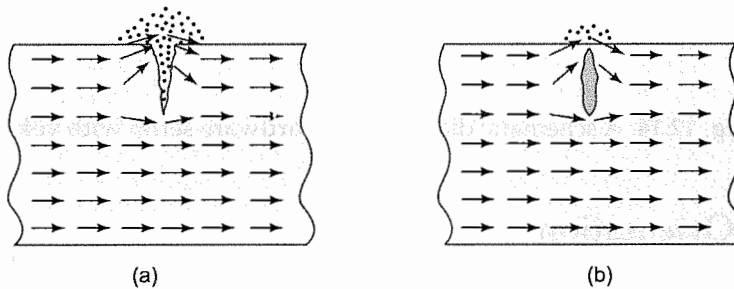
Magnetic flux through work-pieces, (a) a particle ridge is built up over the mouth of a surface crack, and (b) magnetic particles are deposited due to a subsurface crack
